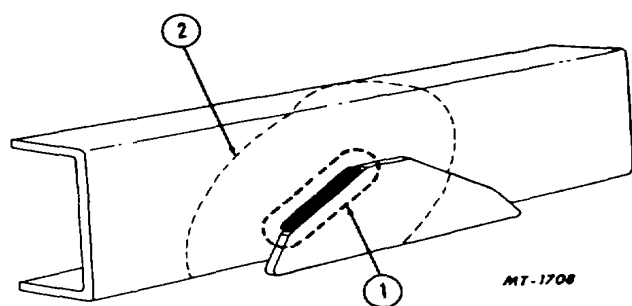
Weld Sample Showing Lower Heat Dissipation Possible With Shielded Arc-Welding
